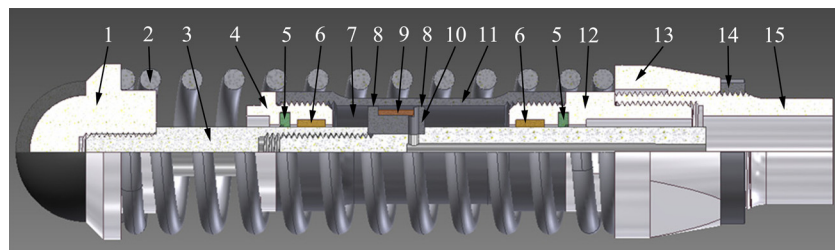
CAD cross-section view of the MR foot. Numbered components: (1) rubber coated foot tip, (2) spring, (3) piston shaft, (4) lower end cap, (5) seal, (6) sliding bushing, (7) MR fluid, (8) MR fluid gap, (9) solenoid, (10) piston, (11) cylinder, (12) upper end cap, (13) spring precompression adjustment nut, (14) spring precompression locking nut, (15) mounting component to the robotic leg.
